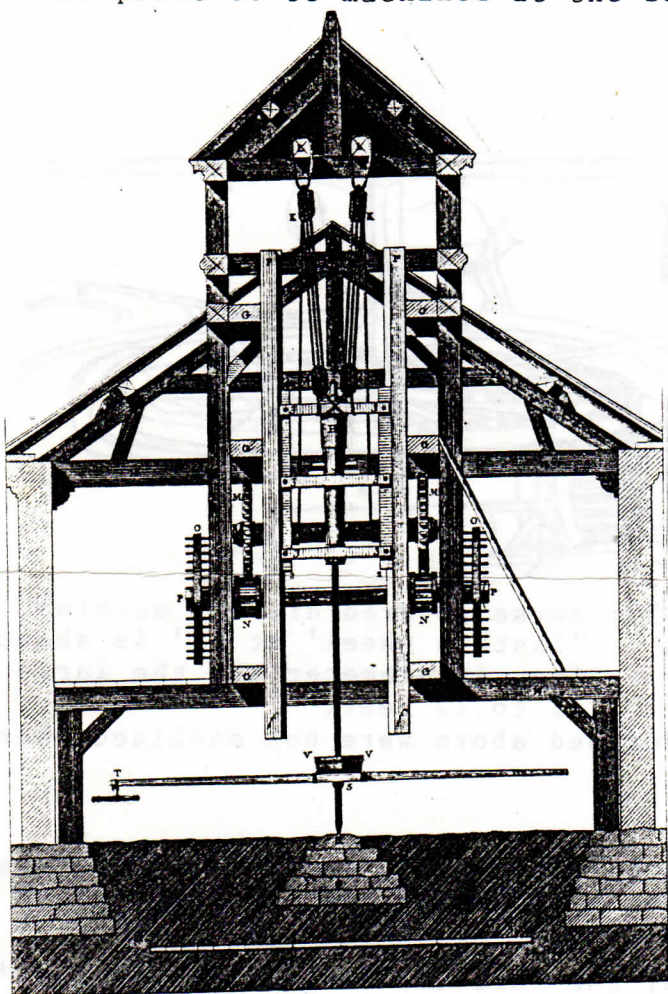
A one or two 'horse-power' machine or 'mill' as it was sometimes called, for drilling and/or boring the bore of a gun. Superseded during the 18th century by the horizontal machine shown in Fig. 52.
